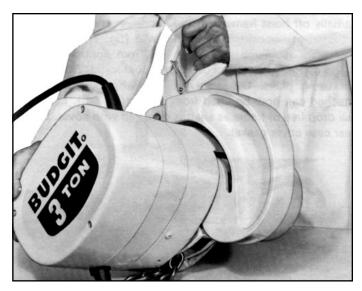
Removing 3 Ton Hanger Bracket from Hoist Frame
